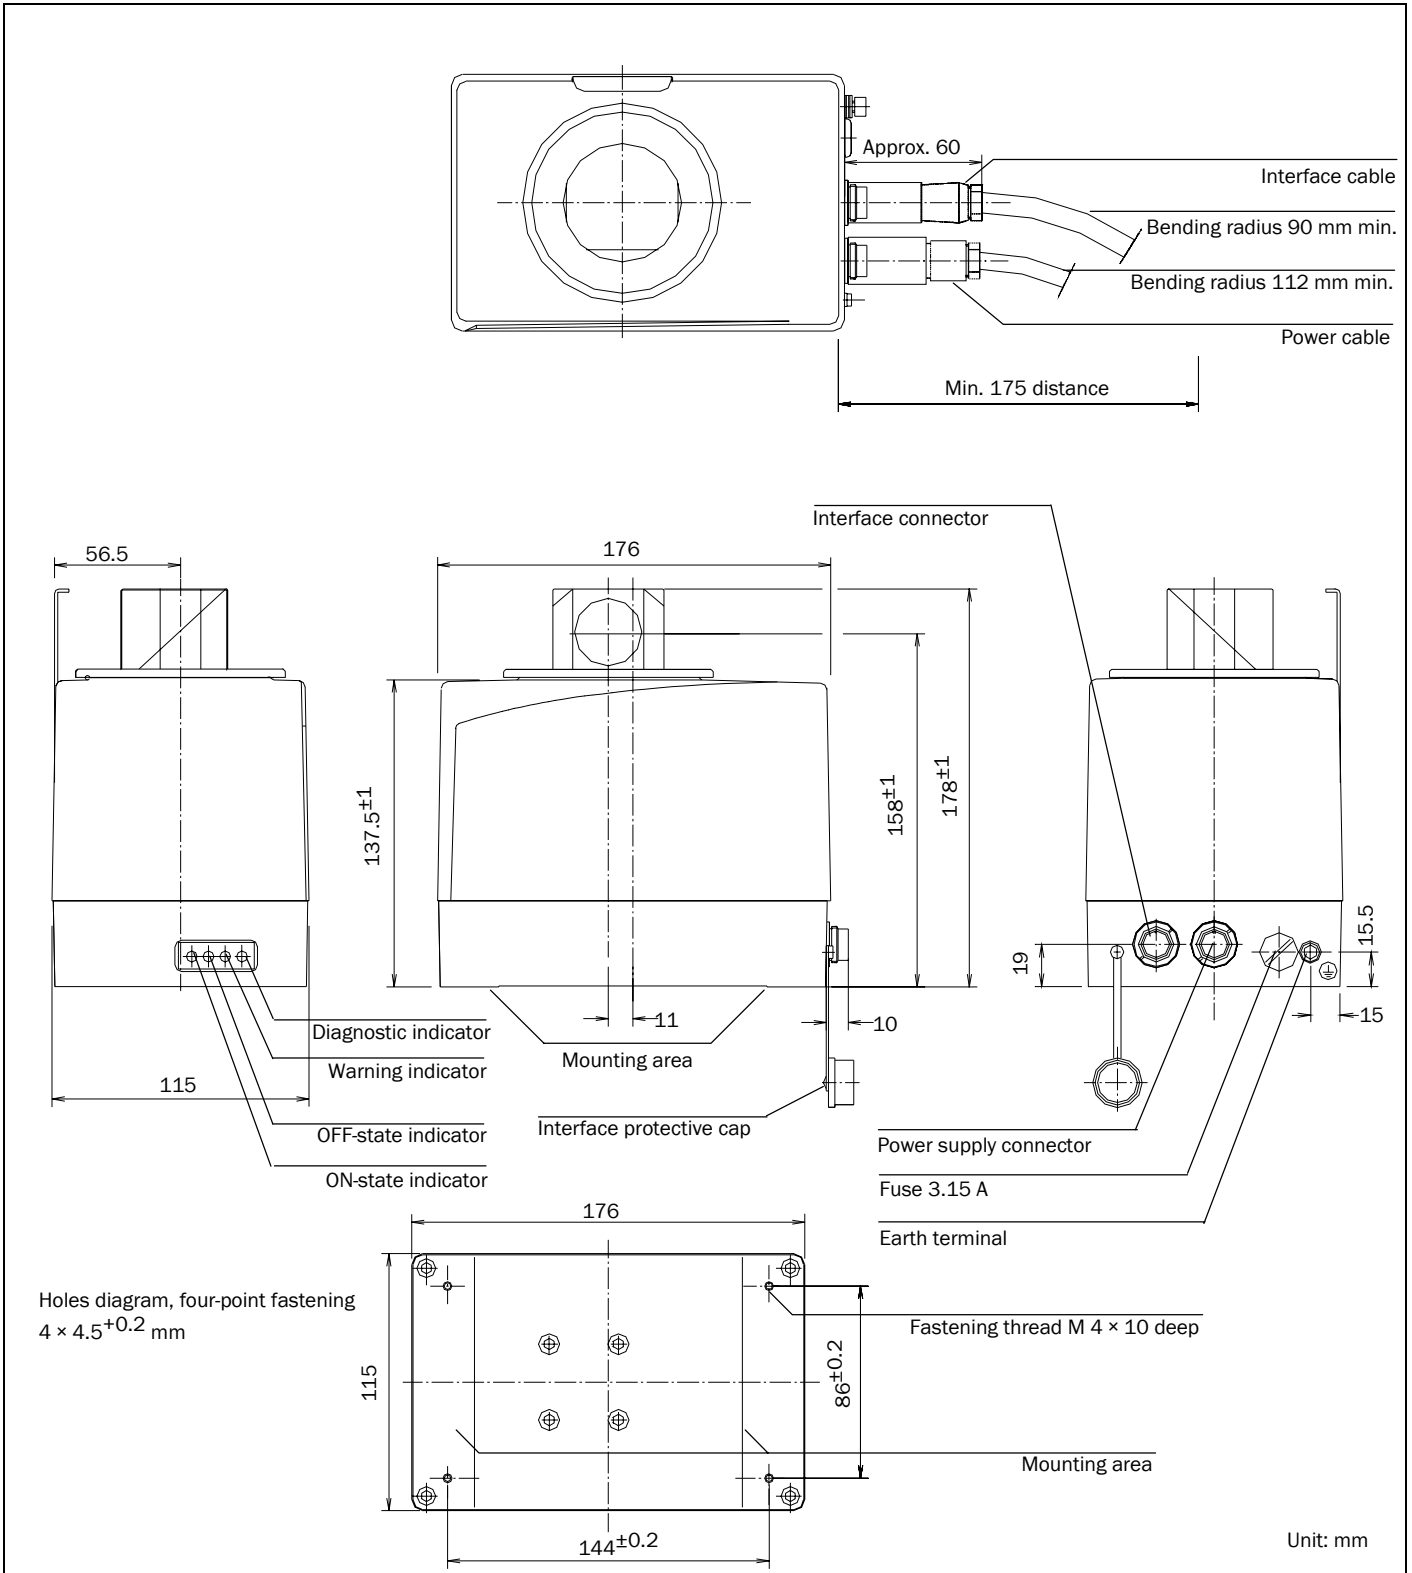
Dimensional drawings, safety laser scanner F3G-C1R70
